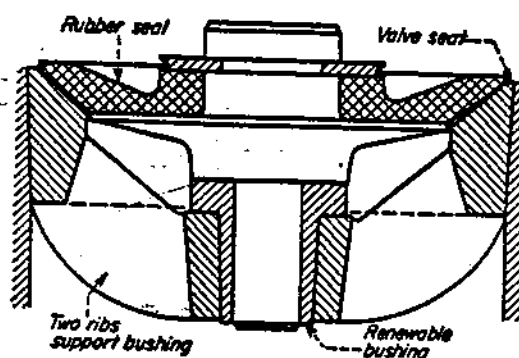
Sealed valve for a slush or mud pump used for oil well drilling. It is sealed by a rubber disk above its body and is supported by a lower guide bushing as well as seat.
